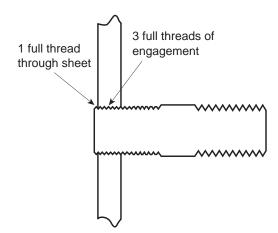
WELDED STAYBOLTS
